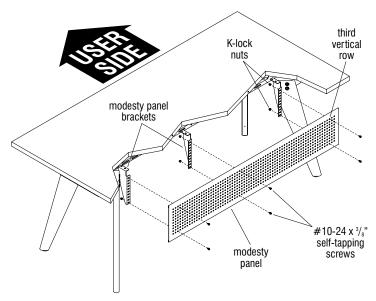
Single Beam Wood Leg Desk, Modesty Panel Installation
